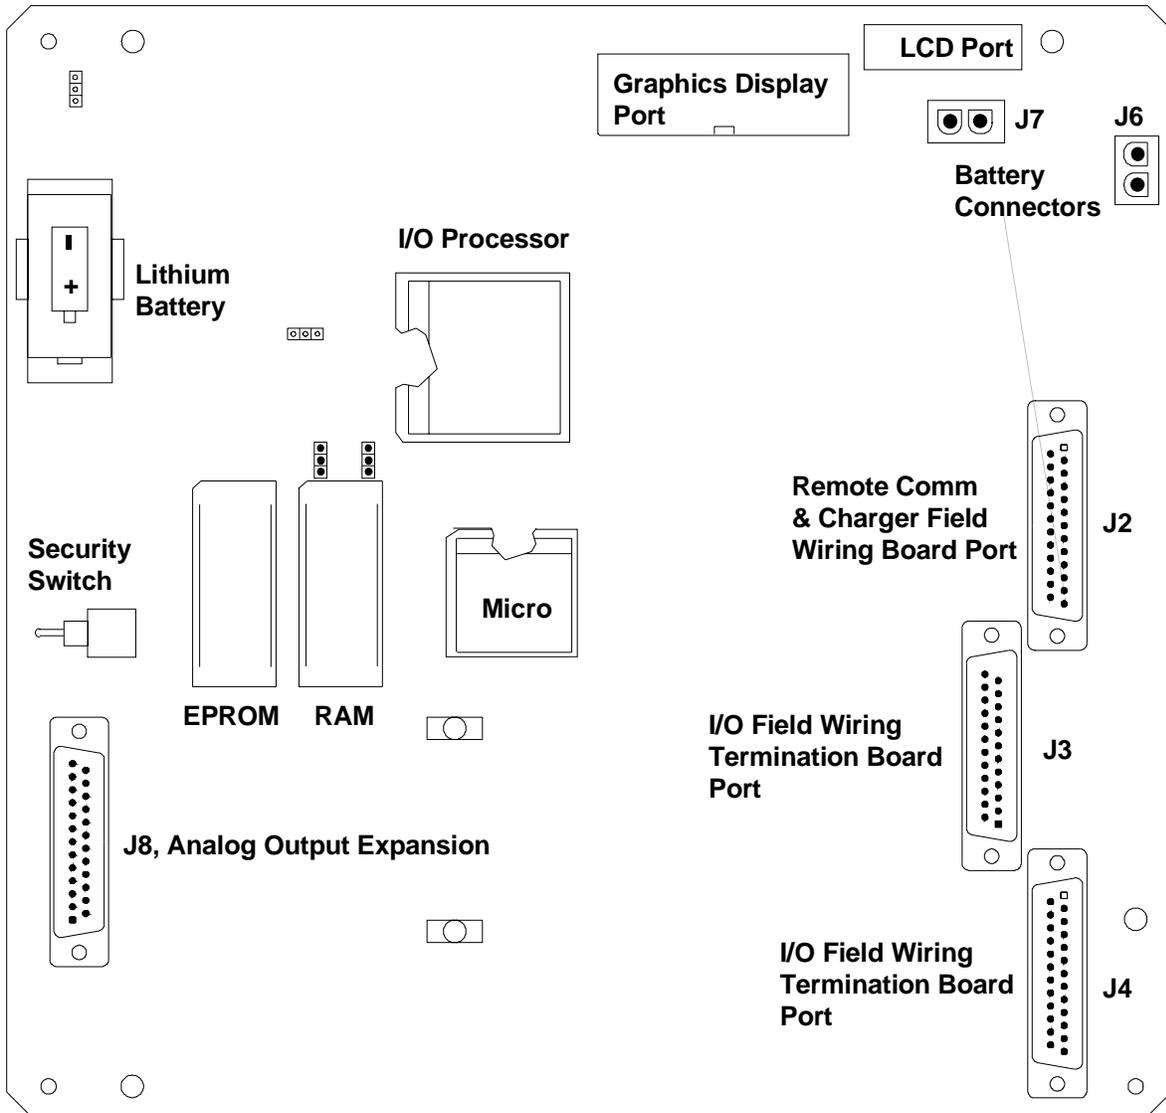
3 6790 RTU Main Electronics Board Component Layout
